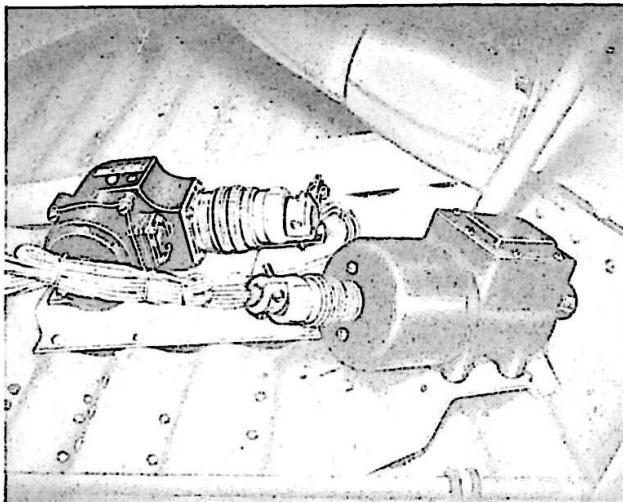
Governor and Waste-Gate-Motor Mountings, Inboard Engines of B-17 Airplanes
